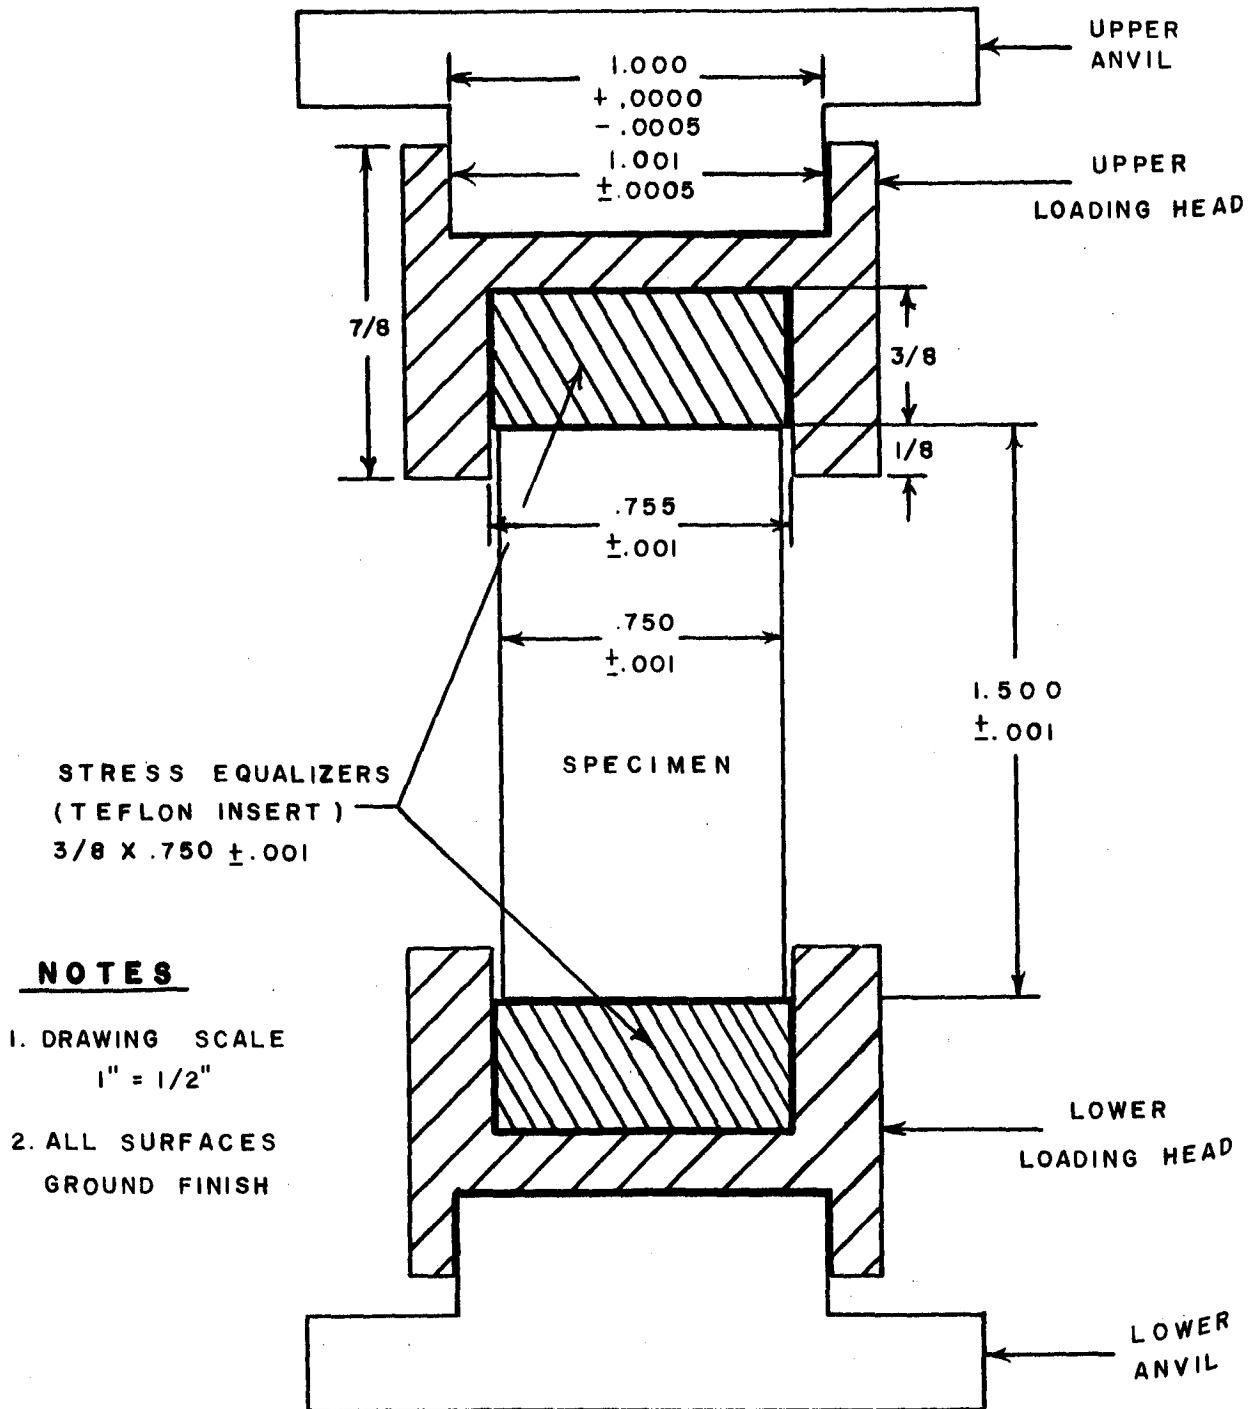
Details of Deformable Insert Type Loading Heads.
